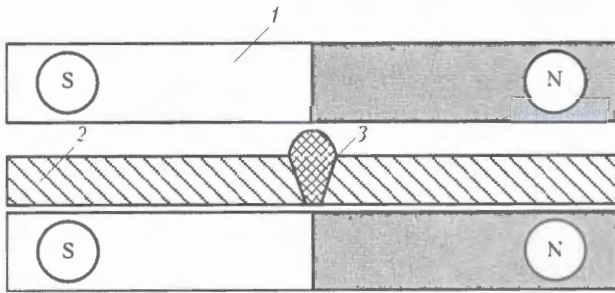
Schematic of exposure of an aluminium alloy specimen containing the weld to the effect of non-uniform magnetic field: 1 – magnets; 2 – specimen; 3 – welding zone
